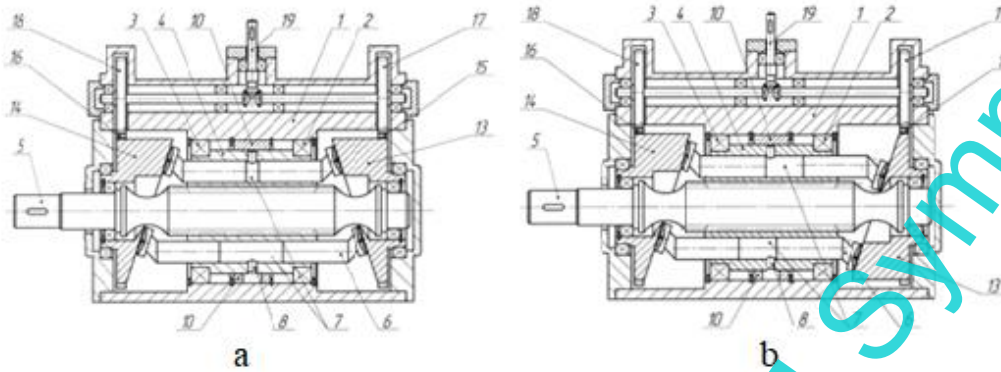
Synchronised adjustable swash plates double axial piston hydraulic machine
